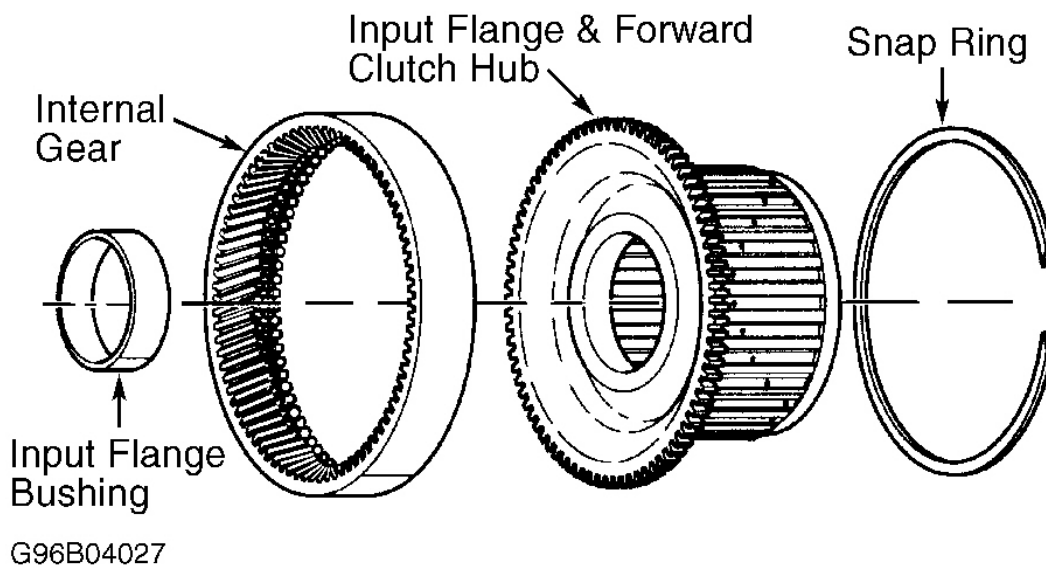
Exploded View Of Input Internal Gear & Forward Clutch Hub Assembly
